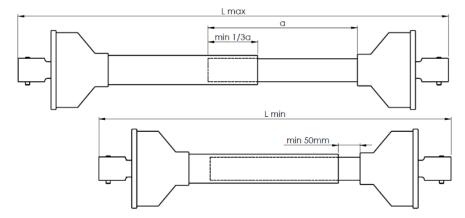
Adjusting the length of the shaft when the spreader is connected to the tractor
